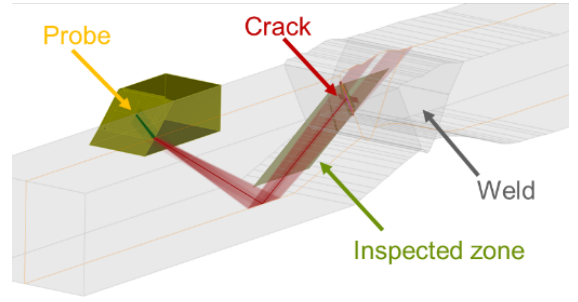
UT inspection configuration, as it can be described with the CIVA software. the weld area joining two stainless steel plates is inspected using shear waves.
